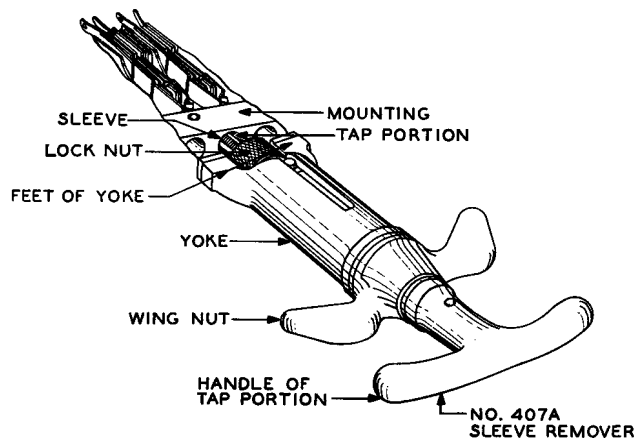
Method of Tapping Sleeve With 407A Sleeve Remover
